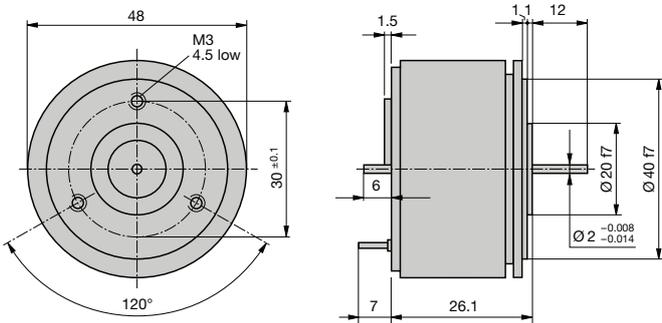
KINAX 2W2 with special shaft drive at front and rear.
